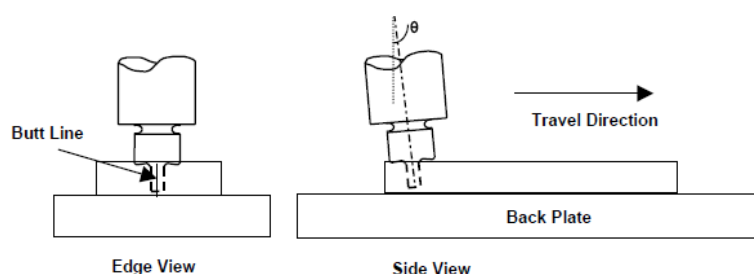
Schematic view of tool and workpieces are tilted with respect to each other (Khaled, 2005).
